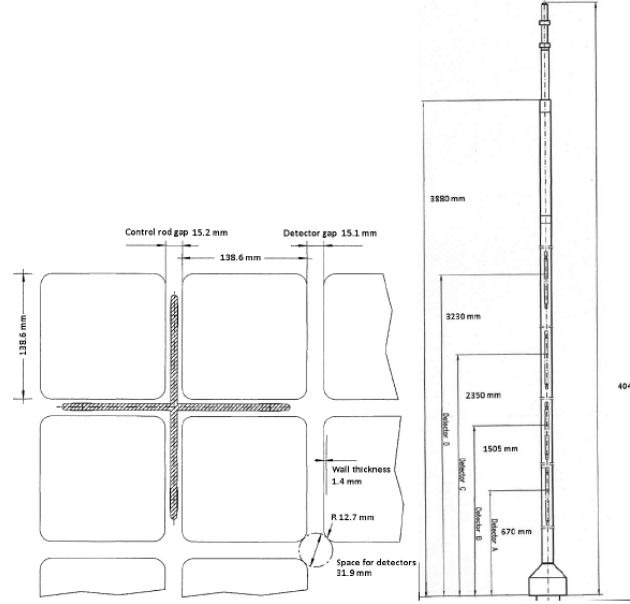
Schematic representation of the boxes surrounding the fuel rods and the detector guide tube position (left), with the detector guide tube dimensions (right).
